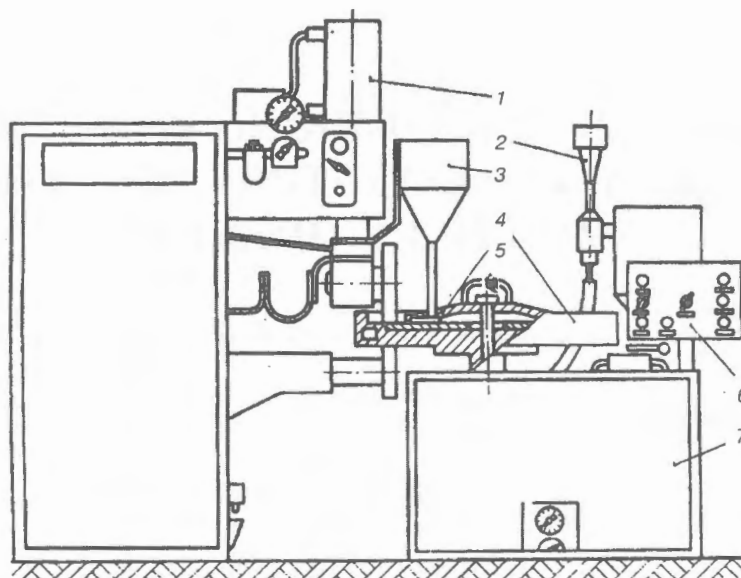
Diagram of a unit for resistance hardfacing of disc cutters [17]: 1 — resistance seam welding machine MSh-3201; 2 — hopper-type feeder; 3 — pneumatic clamp; 4 — water-cooled face-plate; 5 — ejector; 6 — control panel; 7 — base
